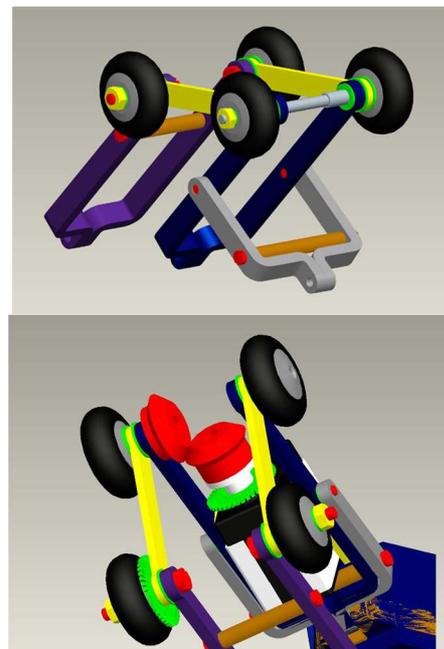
Final design of the arm on wheeled machine with adjustable wheels CEREVKA
